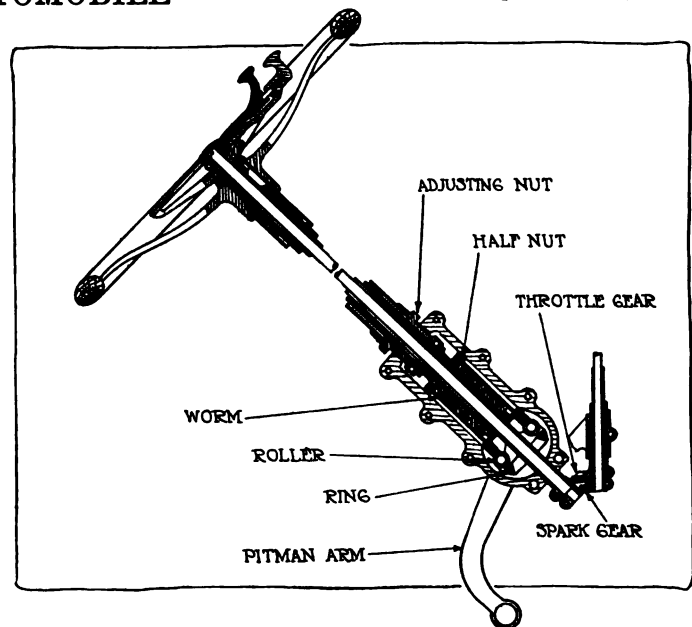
Buick model 24 steering gear showing construction and adjustment
